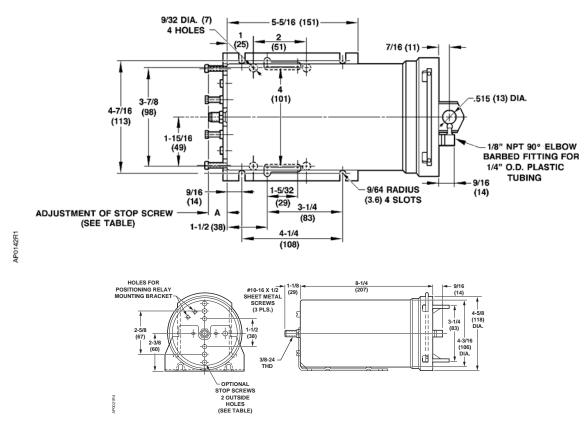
Bracket Mounted Actuator 331-2911 (Typical). Dimensions in Inches (Millimeters).
